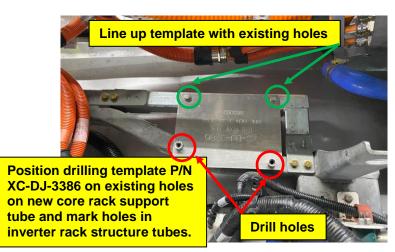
Drilling holes and installing 1/4-20 treaded inserts
